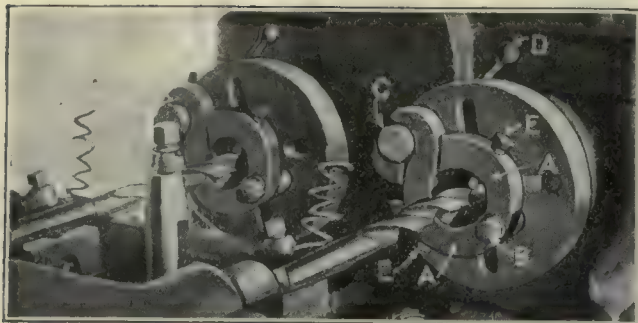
TURNING DRILL SHANKS ON A DUPLEX LATHE
